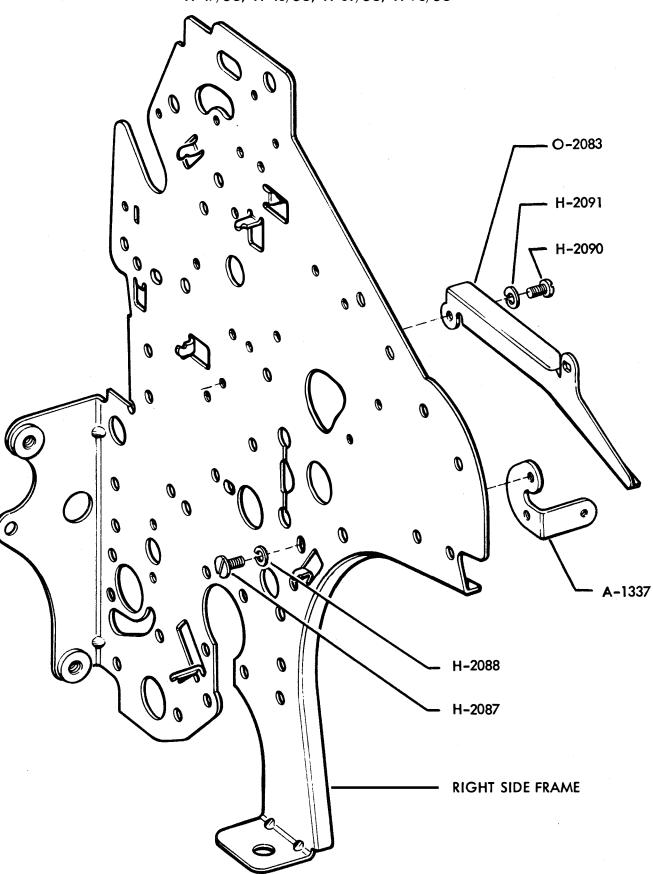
Automatic Typer, Right Side Frame Mechanism
